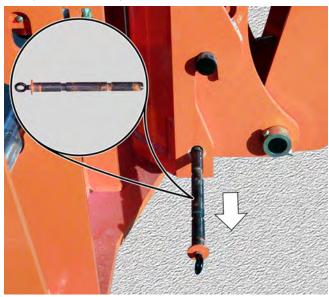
Pull Quick Attach Pin from Attachment and Quick Attach Adapter.
